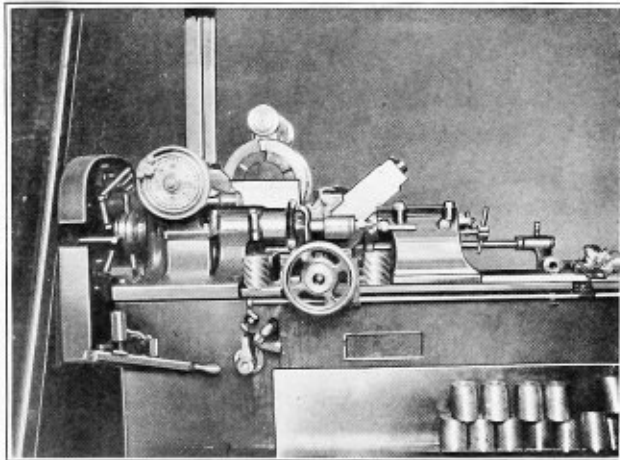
THREAD MILLING MACHINE USED FOR CUTTING WORMS AND TAPERED HOBS
